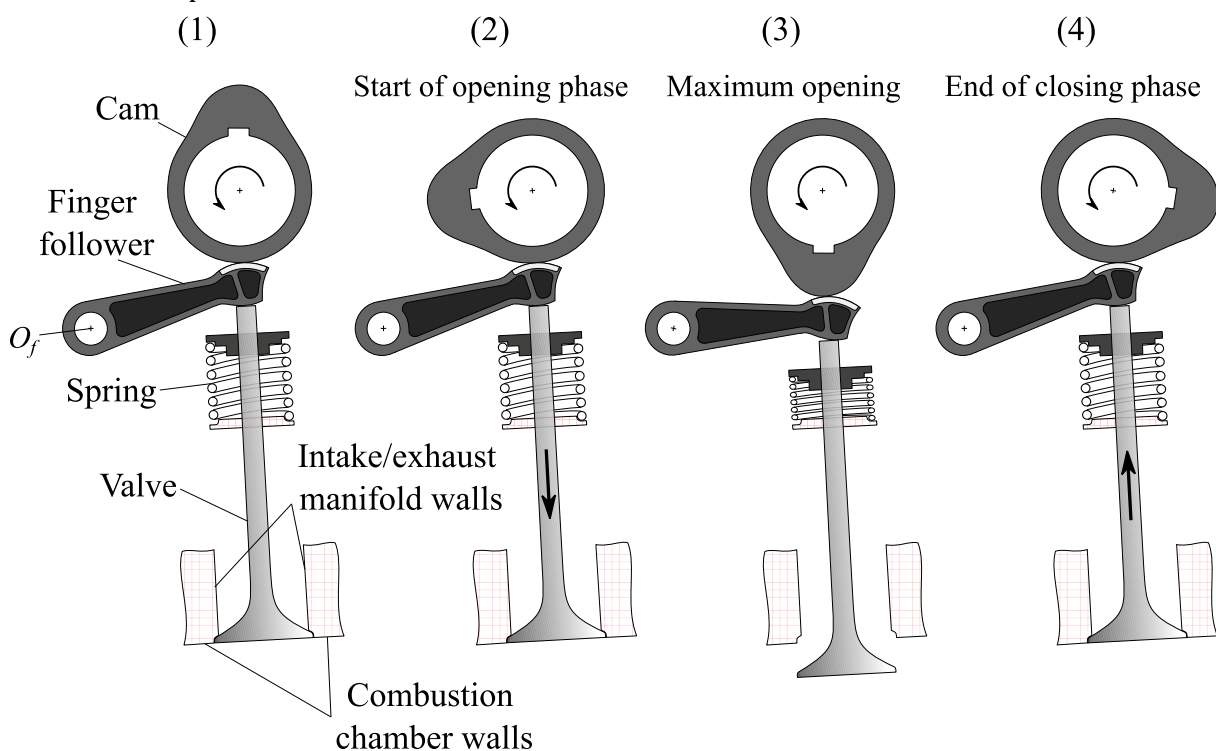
Schematic drawings of cam-follower-valve mechanism. Each of drawings (1) through (4) corresponds to a position during the rotation cycle of the cam.
